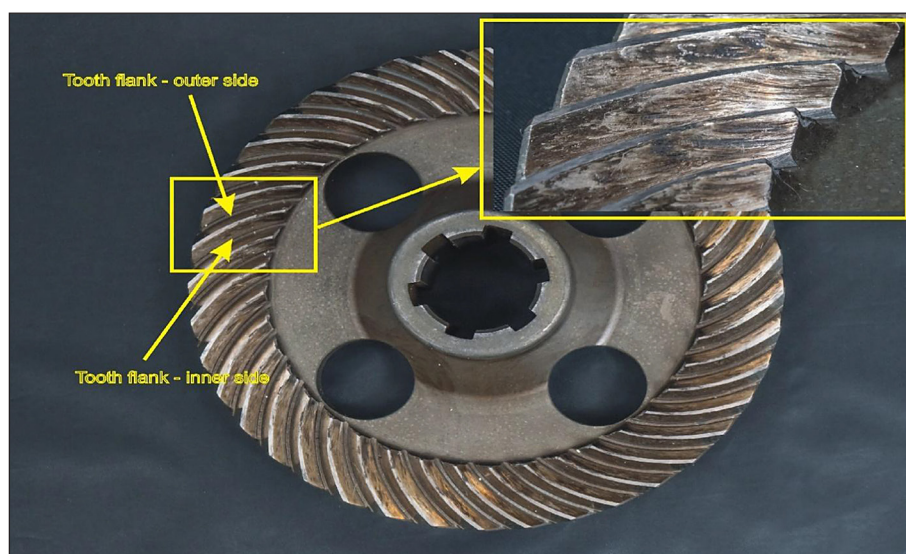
Traces of abrasive wear of the spiroid gear ring wheel
